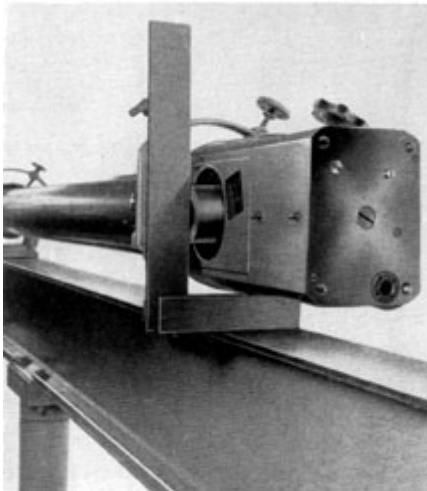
Lining up the eyepiece jig with machinist's square.
